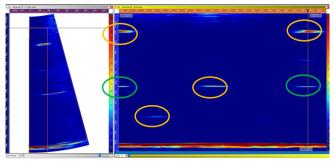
Tower Flange Bolt defects (repeat echoes circled in green)
